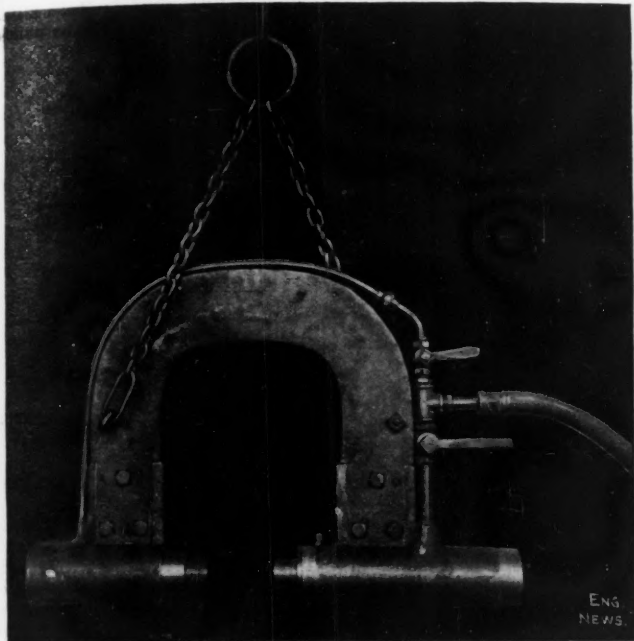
PNEUMATIC RIVETER WITH YOKE.
